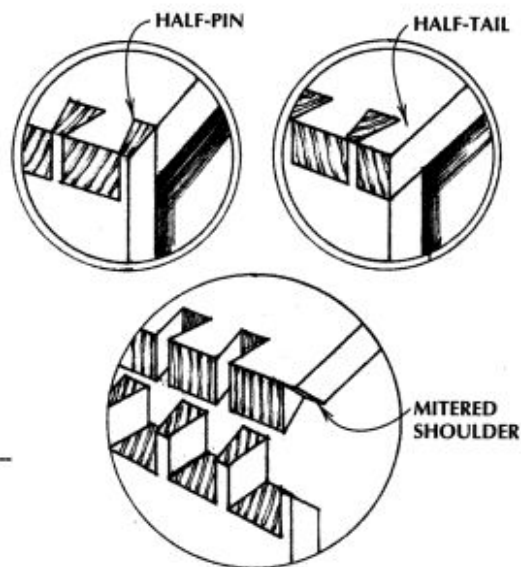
THROUGH-DOVETAIL CORNER JOINT
